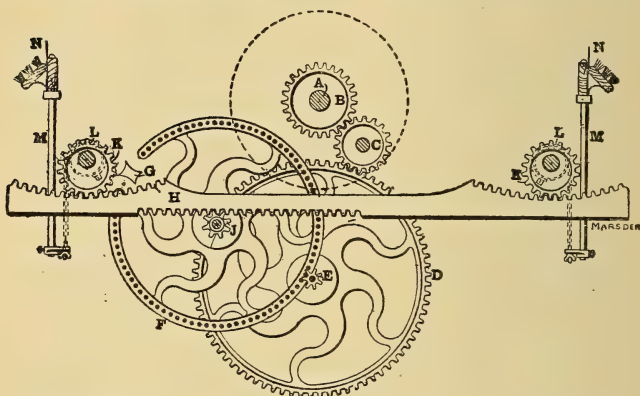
MANGLE WHEEL MOTION IN WINDING MACHINE.
